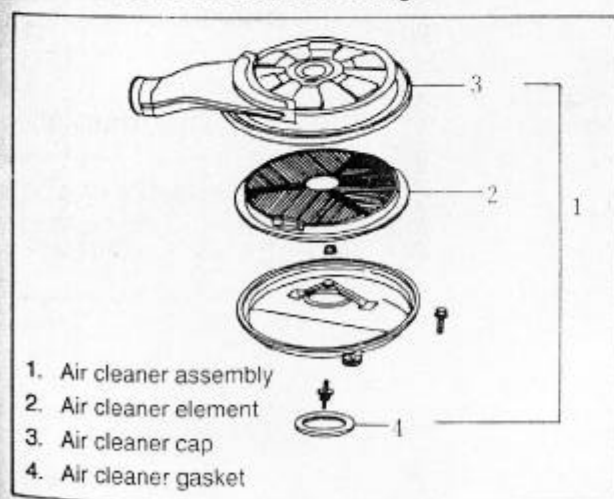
A — 19 REMOVAL OF AIR CLEANER HOUSING
